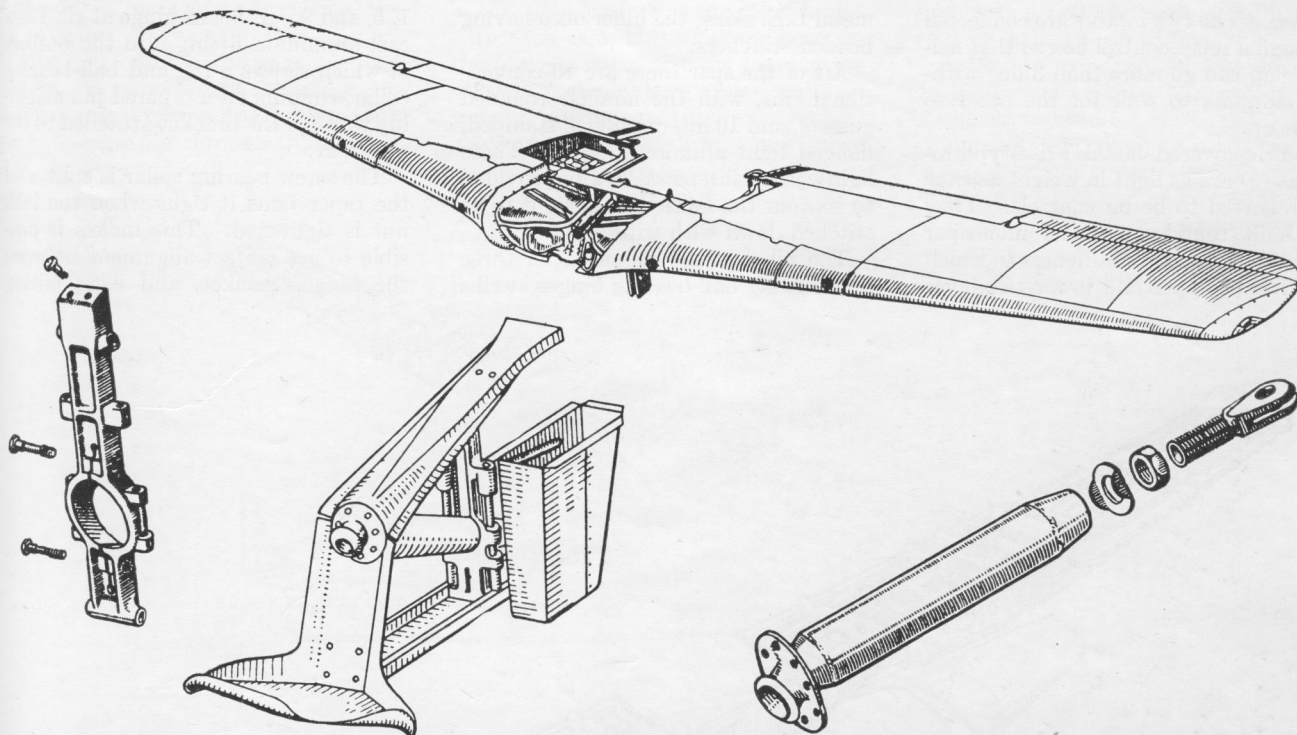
Full cantilever wing on Focke-Wulf FW-190 is built around the front spar, which extends through the plane from tip to tip just below the fire wall. It carries a bottom engine-mount support, shown here in a detail sketch. The inner section of the L.E. is built as a separate unit having its own ribs. The outer section, with conventional D-type ribs, is attached by flush screws to lips extending out from the front spar.
